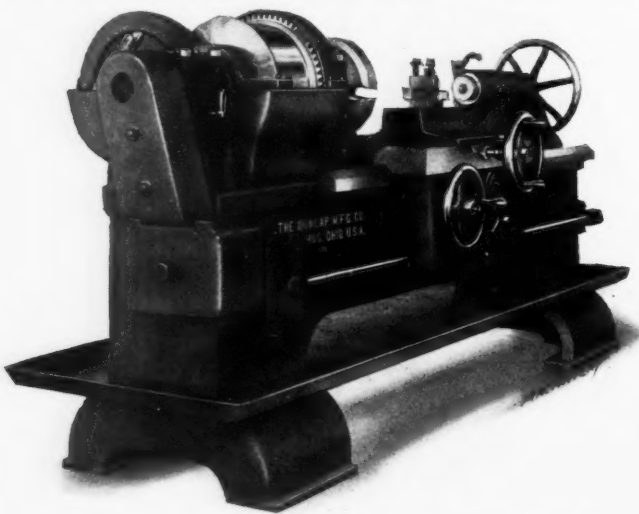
Partial End View of Dunlap Lathe shown in Fig. 1
